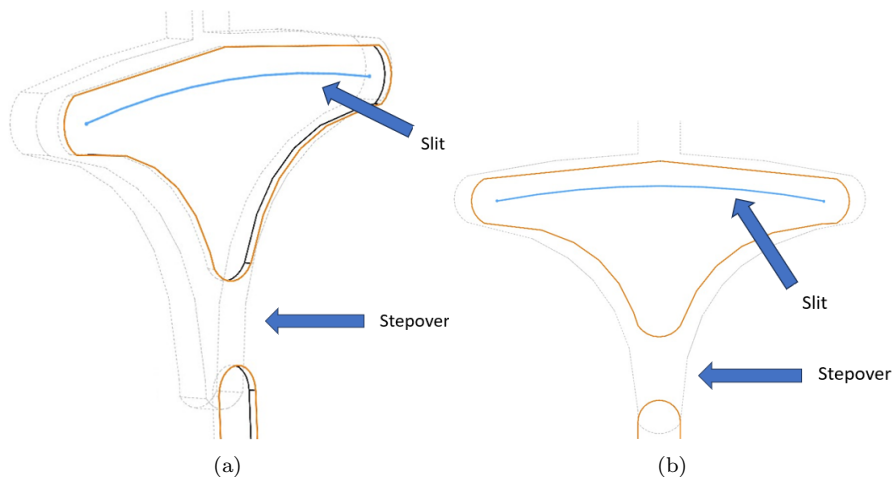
This figure shows an angled view (a) and a top view (b) of the check valve.
